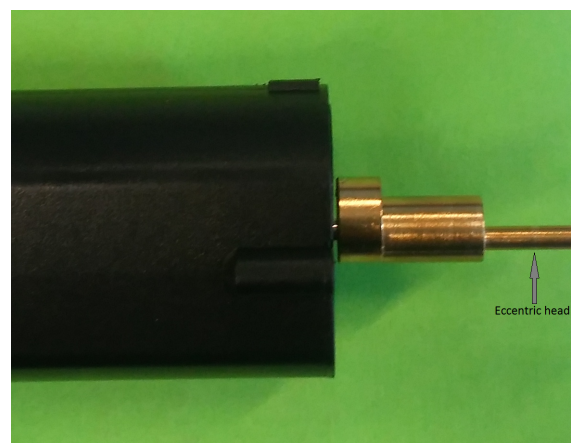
Eccentric head attached to the motor that drives the cutter in a common Philips hair clipper
